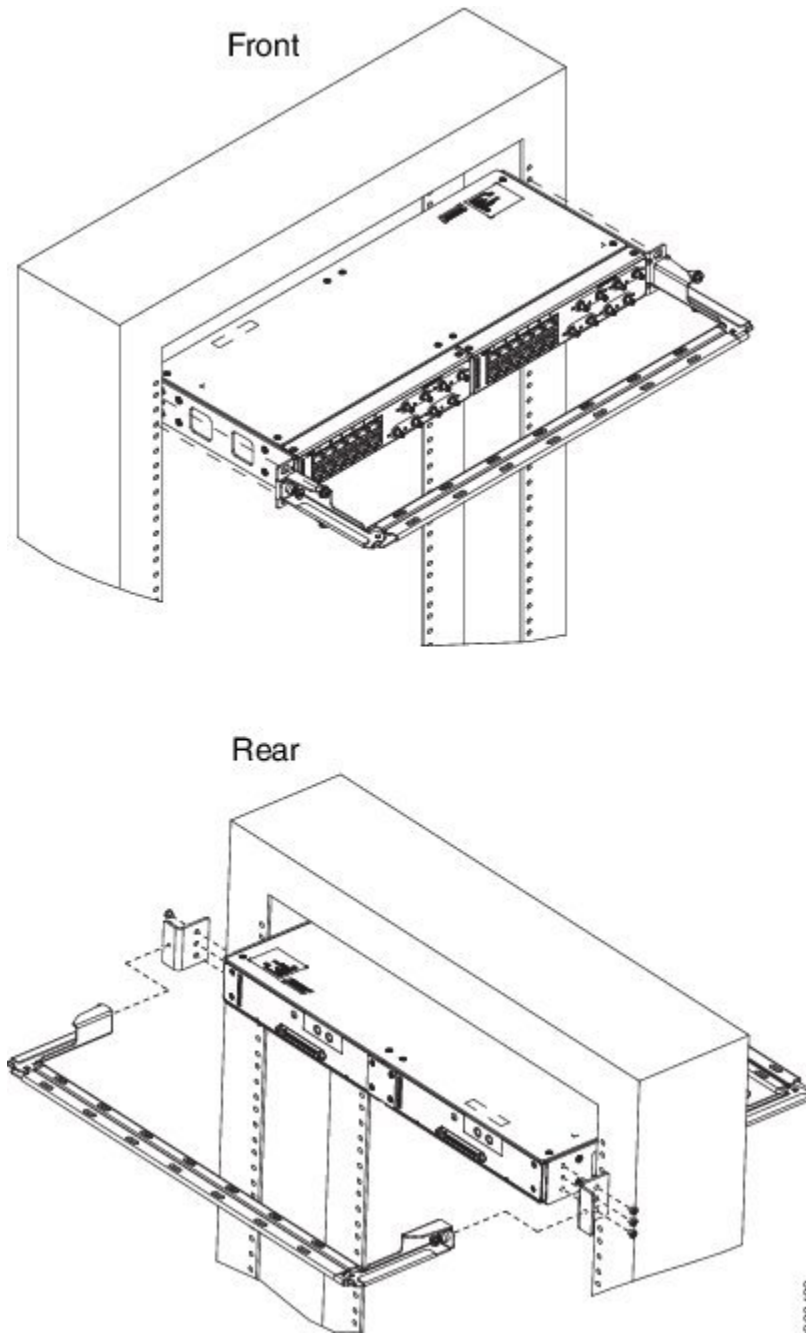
Attaching 21-inch Brackets to Patch Panel - Single
